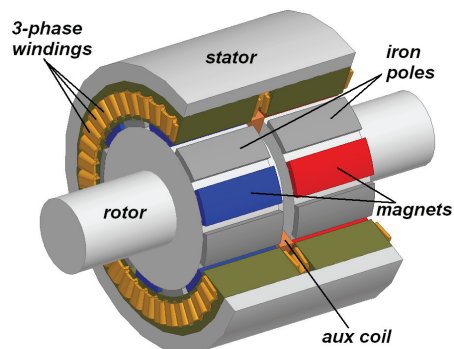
ECPSM with the surface-mounted PM rotor and stator structure exhibiting 3-phase single-tooth windings with auxiliary coil
